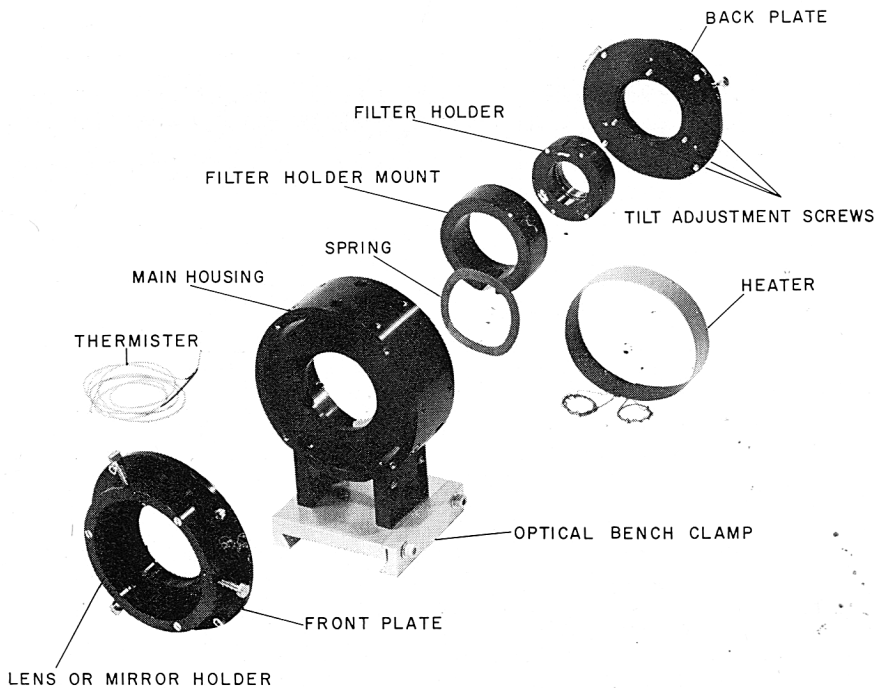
Exploded view of thermal enclosure for a Fabry-Pérot filter.
